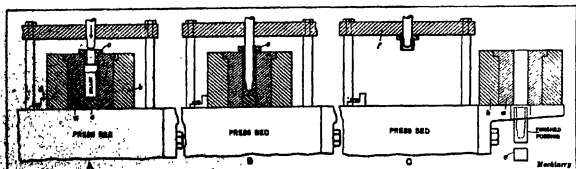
Upsetting method of making shrapnel forgings in one heat and operation.
